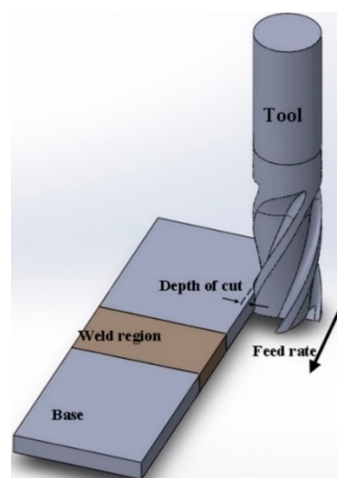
Schematic design of cutting process for welded specimens.
